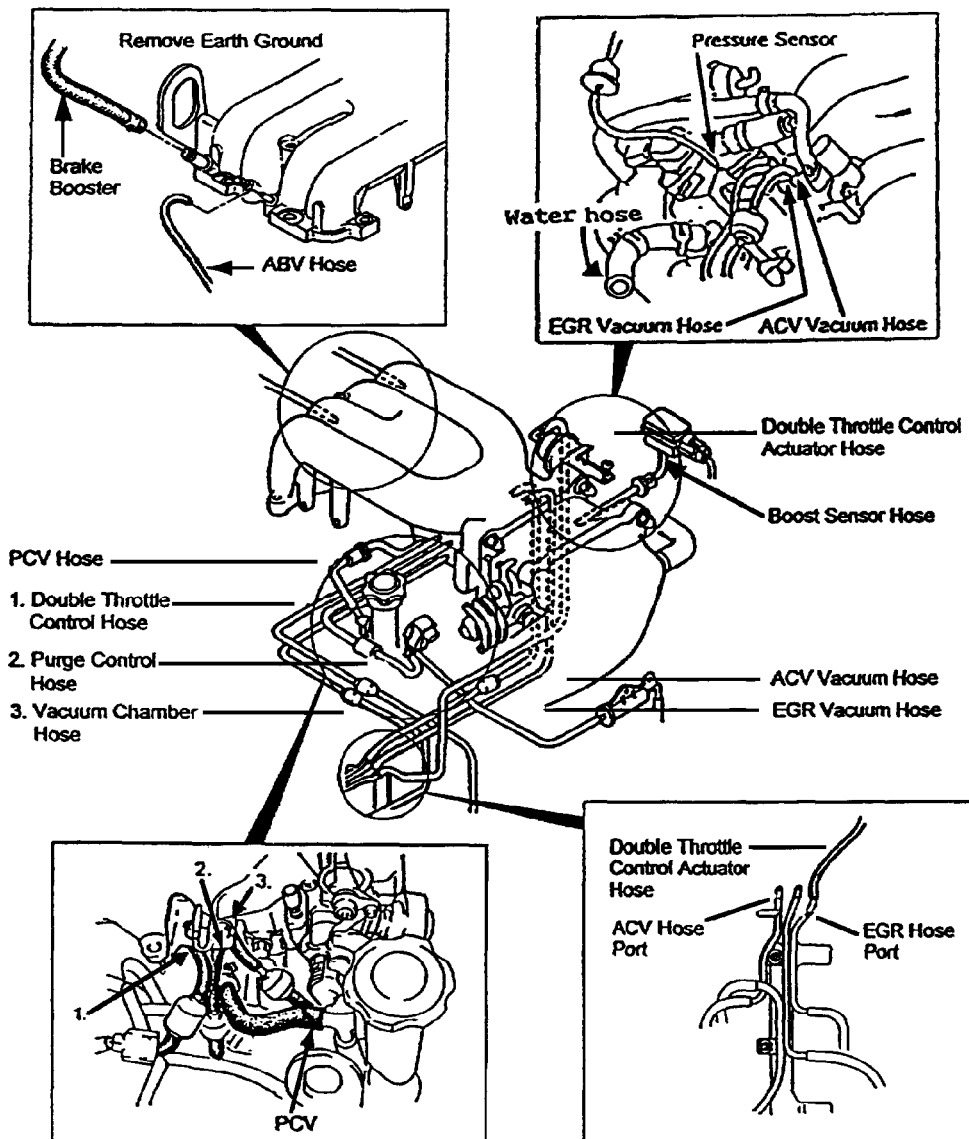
Removing Hoses & Harnesses From the Extension Manifold
